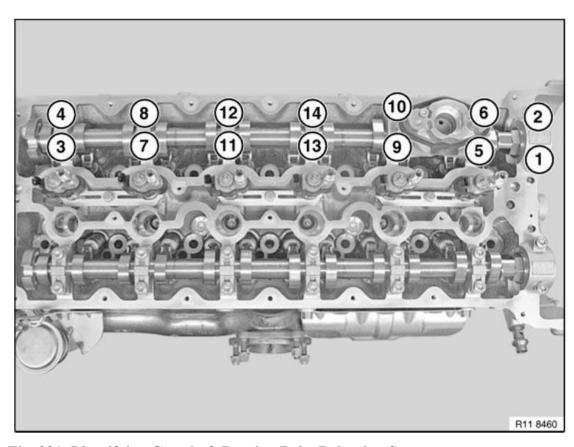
Identifying Camshaft Bearing Bolts Releasing Sequence Courtesy of BMW OF NORTH AMERICA, INC.
